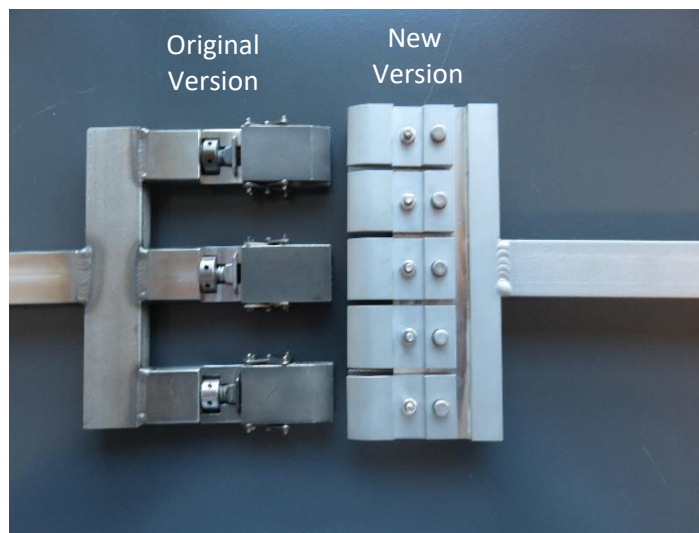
The two preform grip assemblies: (left) original version and (right) new version.
